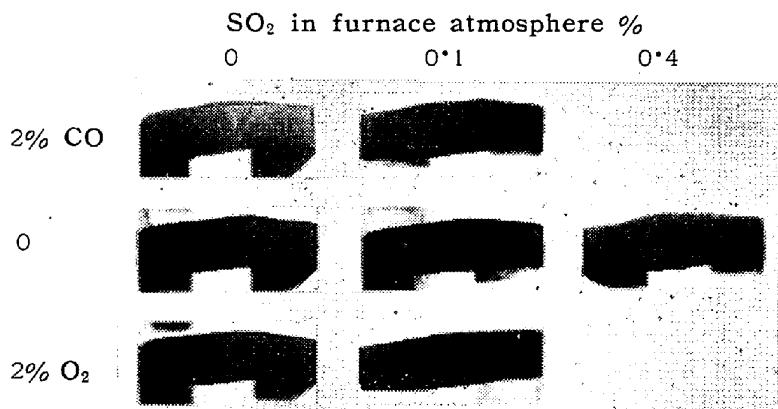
Cracks of hot bending test specimens of low carbon steel after heating of one hour.
